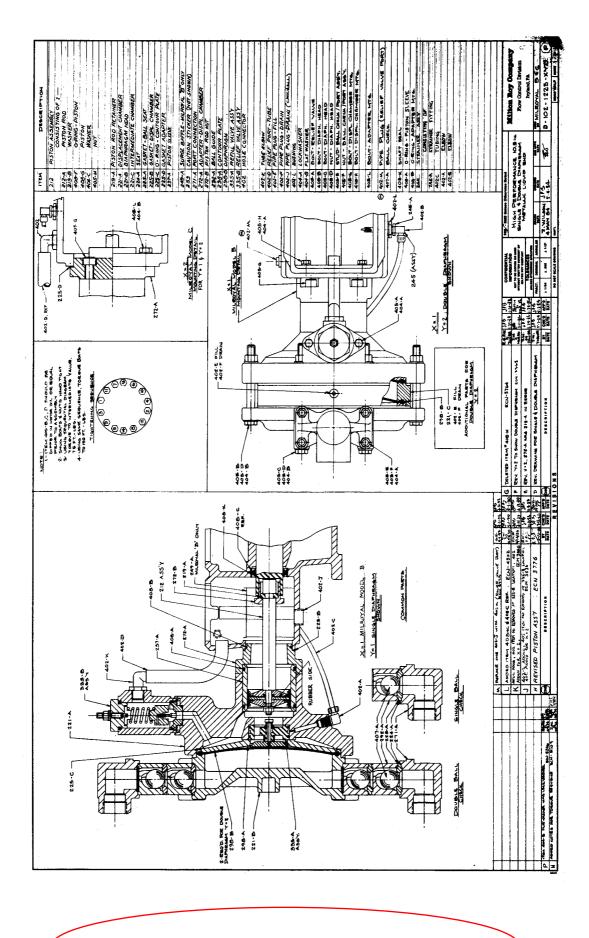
HPD Liquid End Customer Parts Drawing (102-1223-000).
